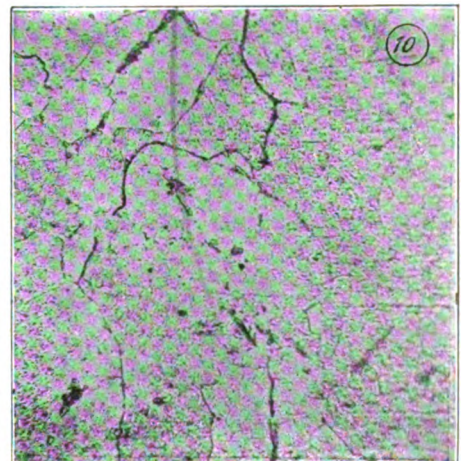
Inter-granular cracks in strained oxy-acetylene weld.
